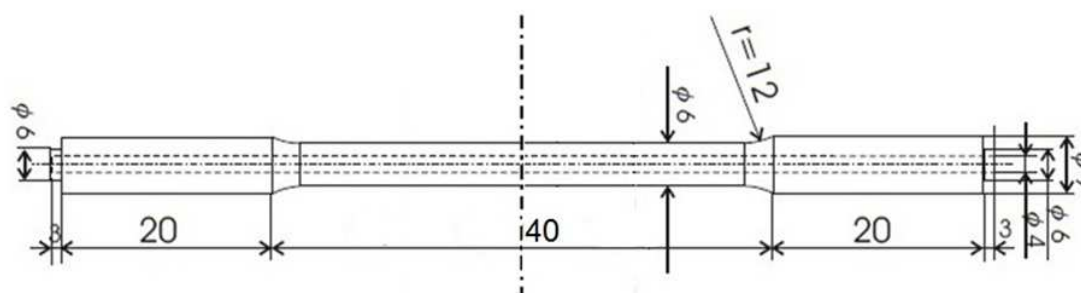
Schematic of hollow cylindrical sample dimensions.
